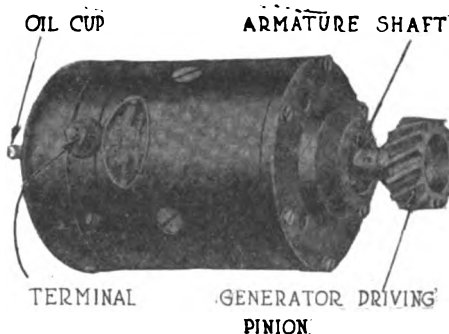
The generator is driven from the large timing gear. It will be noted that the gears are spiral
